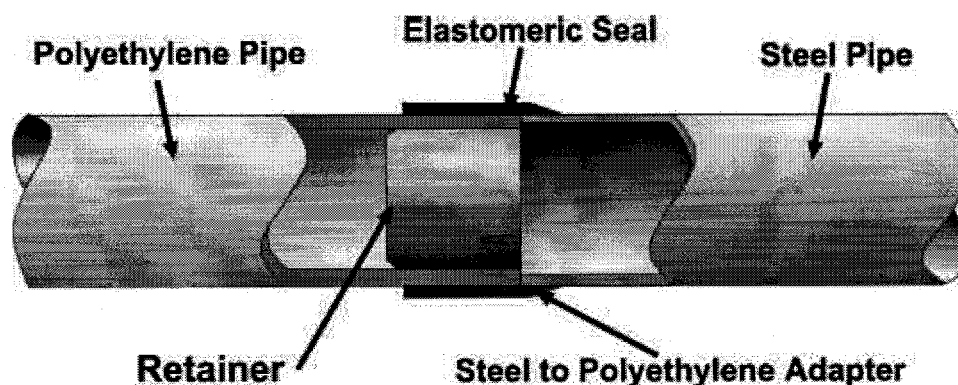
Standard Fitting for Plastic Pipe to Steel Pipe Transition
